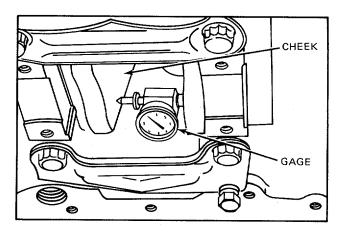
Crankshaft Distortion Measuring Gage Mounted on Crankshaft
